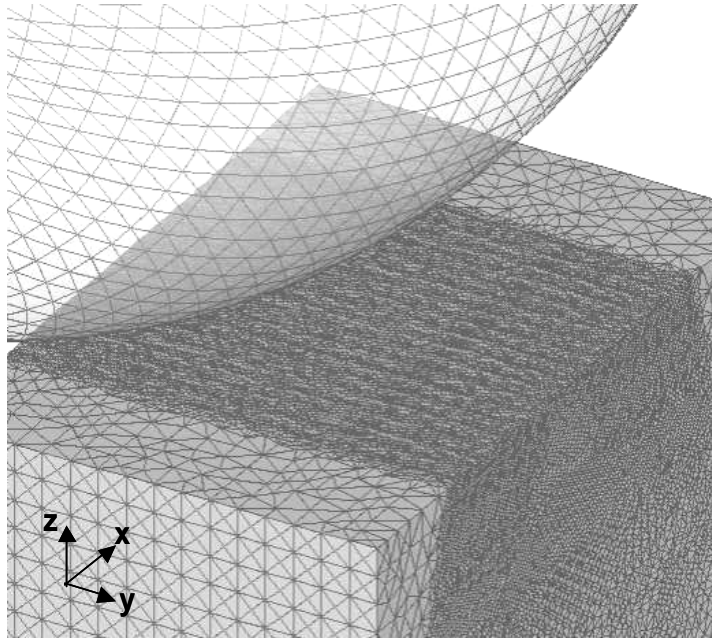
Meshes of the ball tool and the workpiece in the 3D roller burnishing simulation
